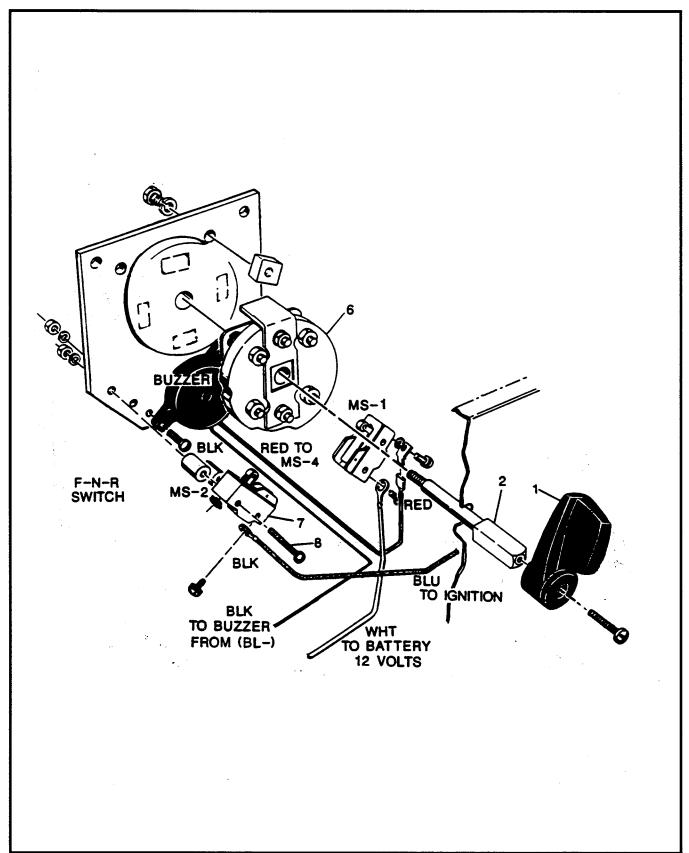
FORWARD-NEUTRAL-REVERSE SWITCH ASSEMBLY
